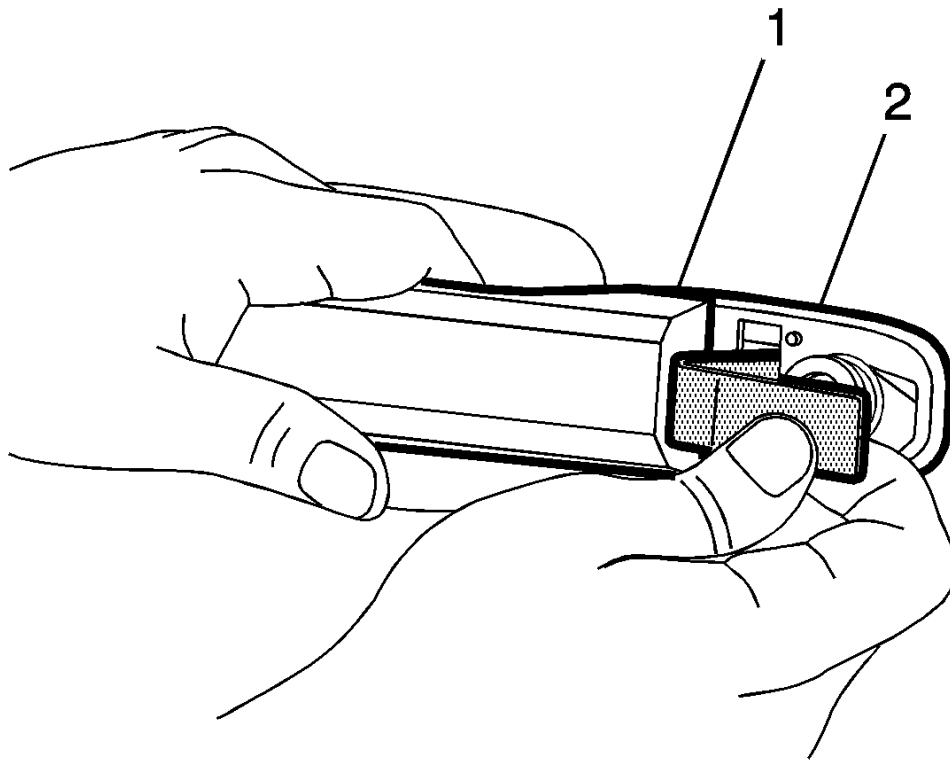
Front Side Door Outside Handle & Spring Retainer
